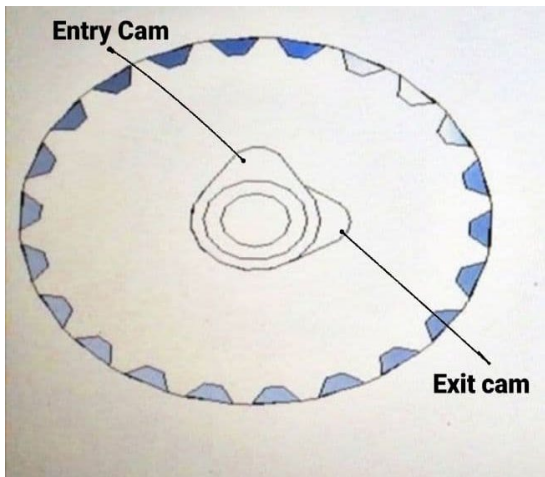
The view of the camshaft on the gasoline engine.
